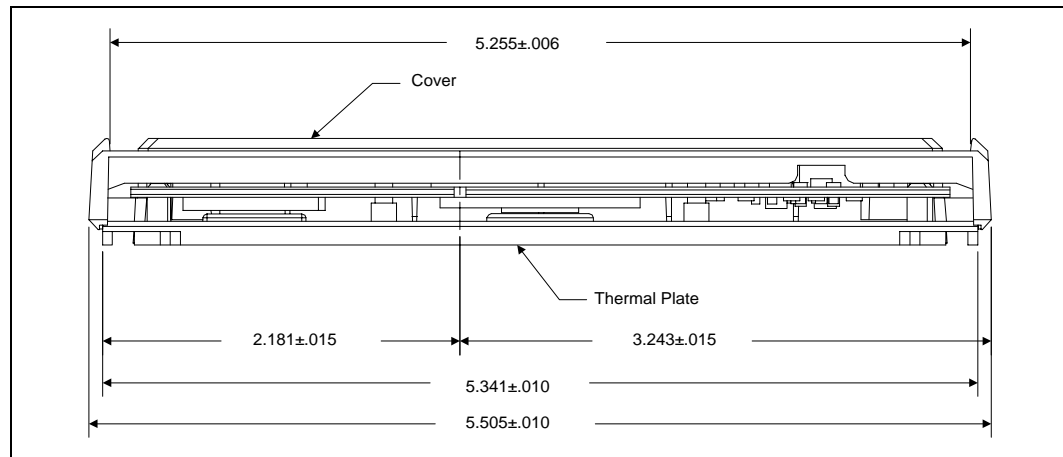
S.E.C.C. Packaged Processor — Latch Arm, Extended Thermal Plate Lug, and Cover Lug Dimensions
